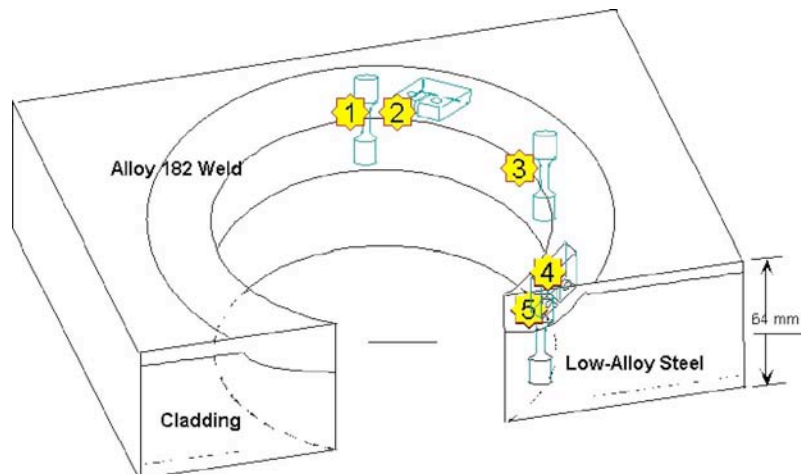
Orientation and location of the mechanical-test specimens from the J-groove weld of Nozzle #11 on which defects were found during fabrication.
